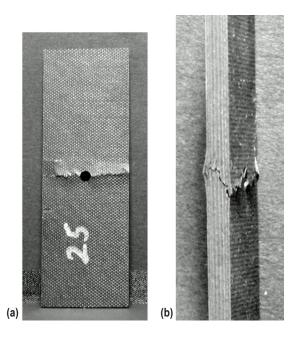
Front (a) and side (b) view of failed OHC specimen.
